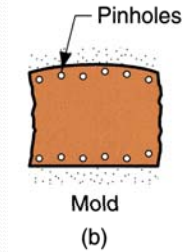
Common defects in sand castings: (b) pin holes
